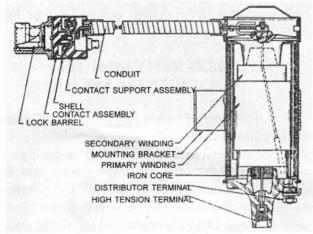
Delco-Remy switch extension type lock and coil assembly.
